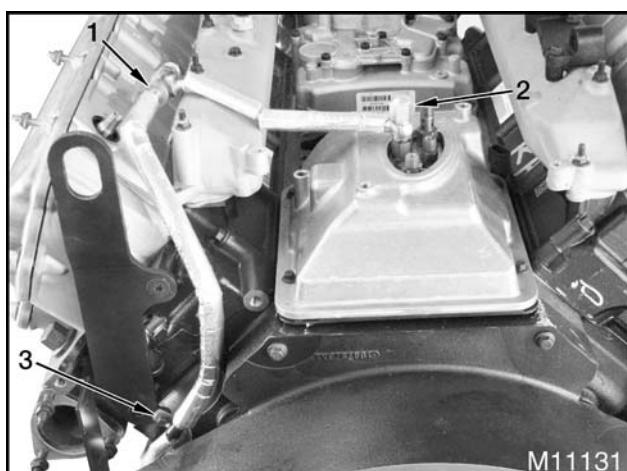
High-pressure pump to cooler tube assembly — upper connection
